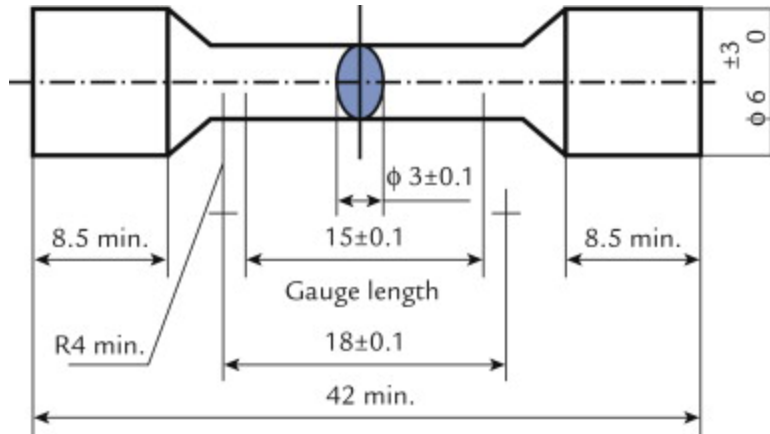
Test specimen with radius shoulders (dimensions in millimeters).
